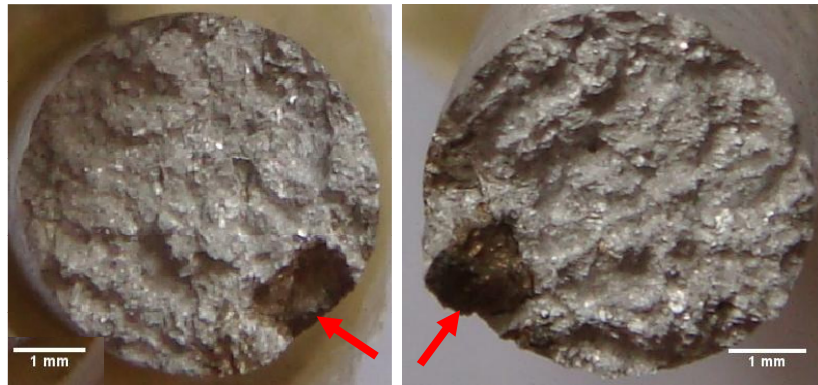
Fracture surfaces of defect containing AZ80 tensile specimens, showing oxide bi-film (tarnished region) on surface.
